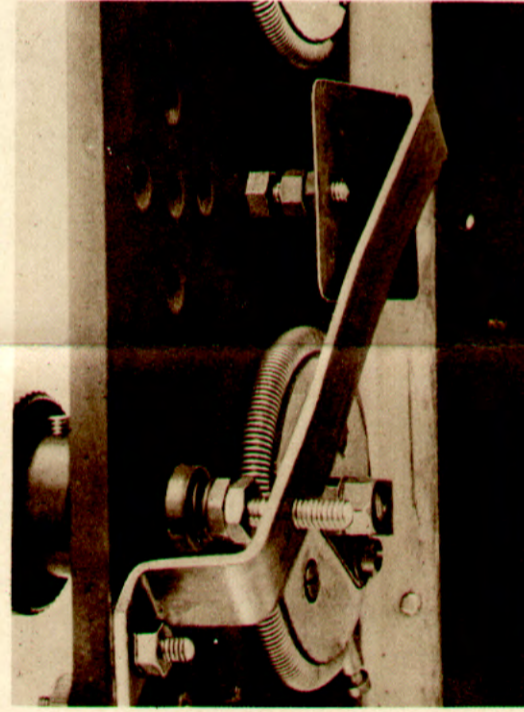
How the fixed plate of the variable condenser is attached. One nut locks the screw rigid to the panel, the next locks that soldered to the fixed plate
